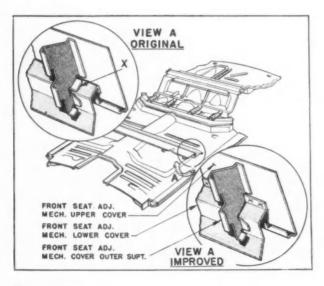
Original and improved designs of front seat adjuster mechanismona Fisher body.
